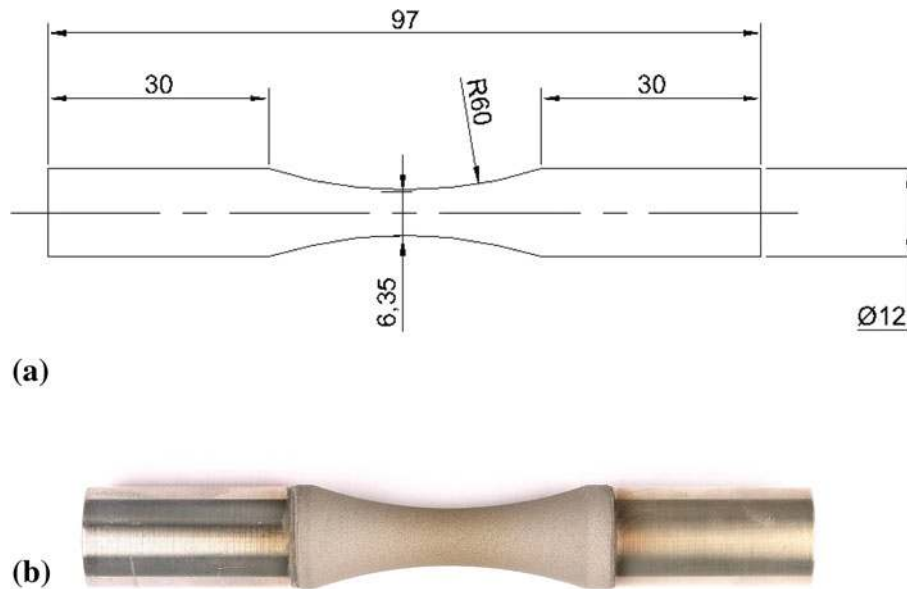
Fatigue specimens. All the dimensions are in mm. (a) Drawing and (b) as WCCoCr sprayed
